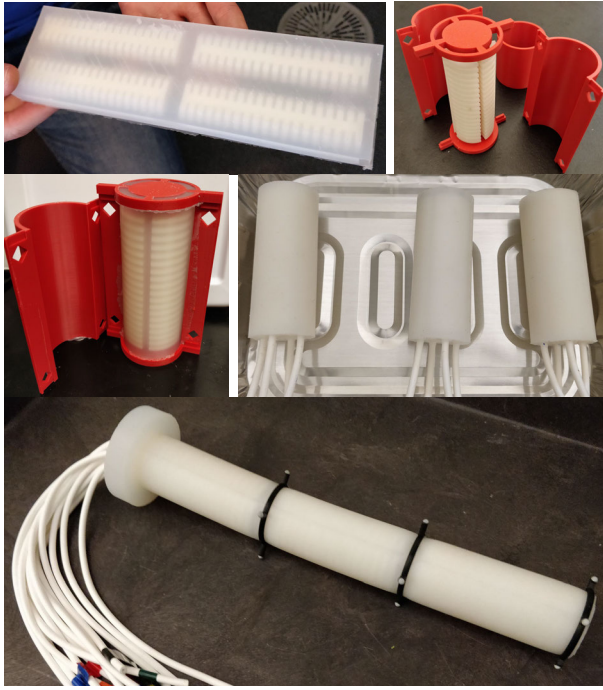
Manufacturing overview of the 3D soft arm. From Top Left to Bottom Right: Creation of four wax cores through casting; assembly of wax cores into 3D printed molds; casting of Silicone Rubber into the mold; Removal of wax through melting and addition of silicone tubing; Routing of tubing, gluing, labeling and adding markers.
